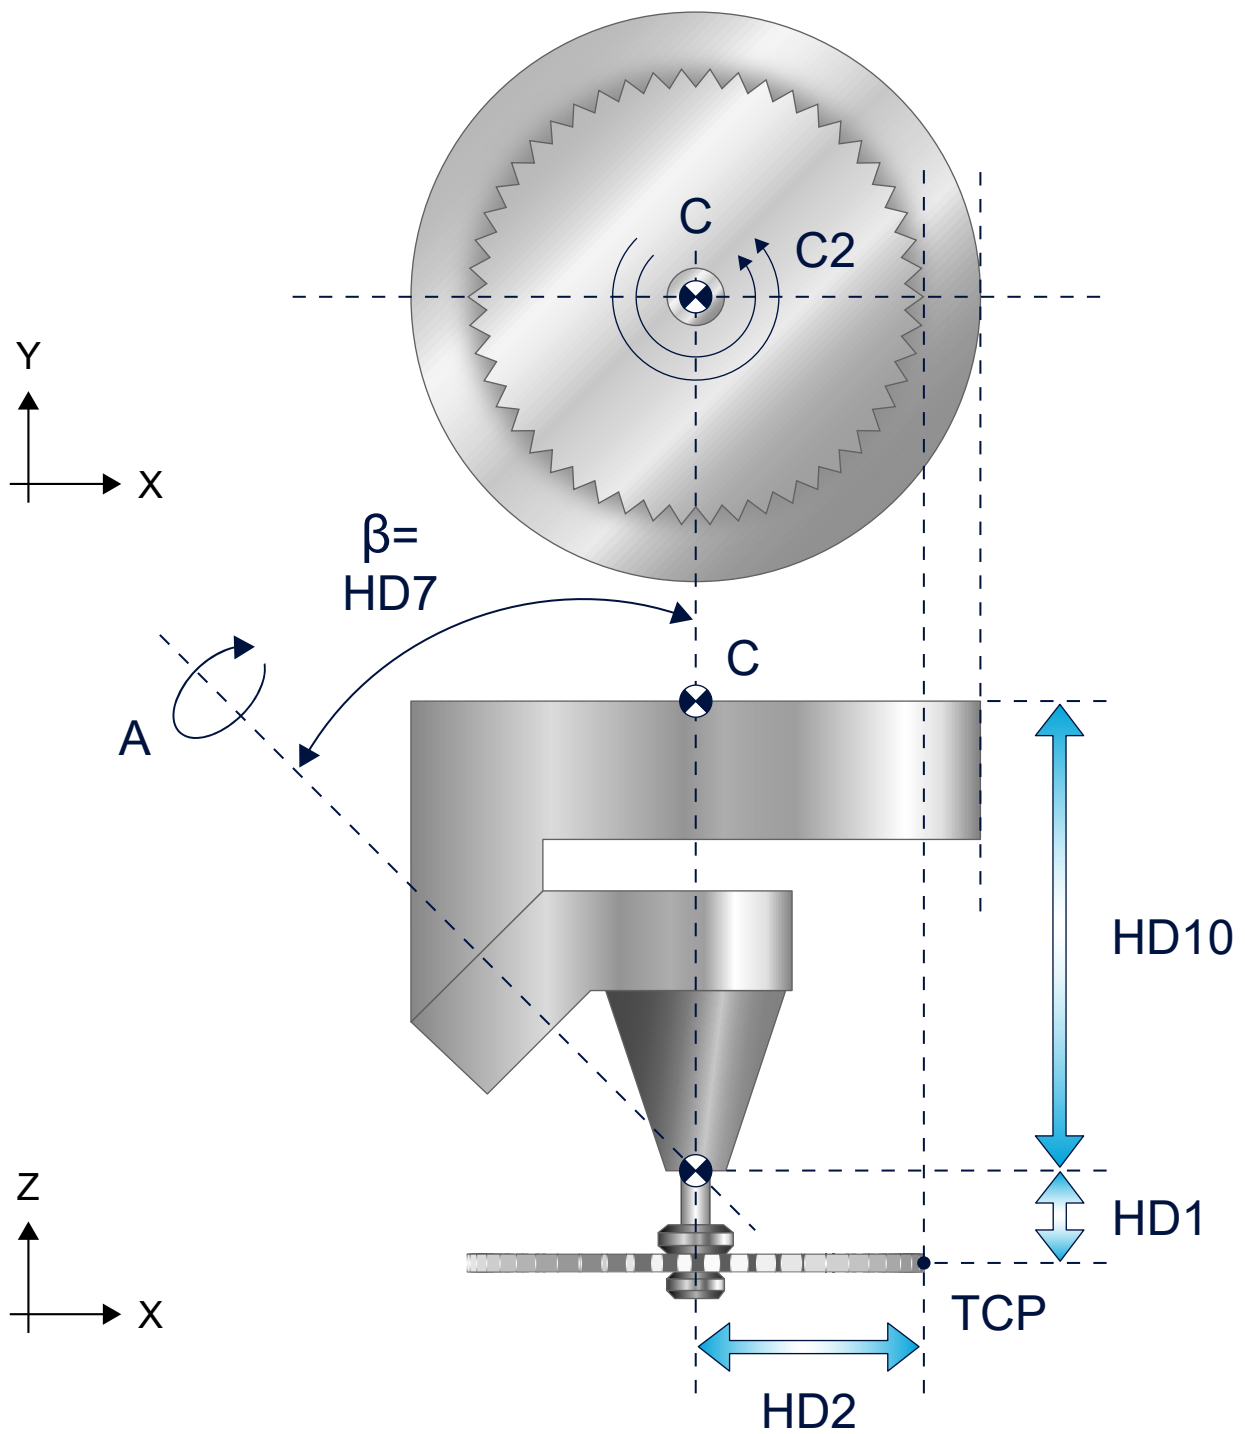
Cardanic head with saw tool and TCP at saw tooth
